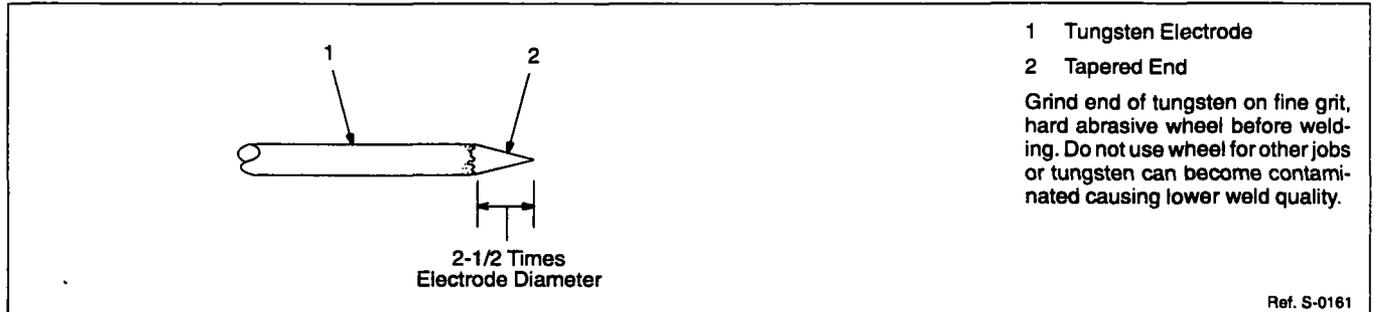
Preparing Tungsten For DC Electrode Negative (DCEN) Welding
